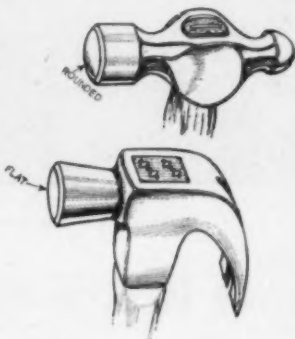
A carpenter's hammer (below) should never be used for striking hard metal, as the face is flat. A mechanic's hammer has a rounded face and is designed for this purpose.
